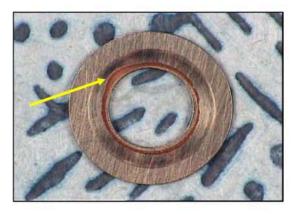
Intake valve sealing disk, sealing face toward the intake valve
